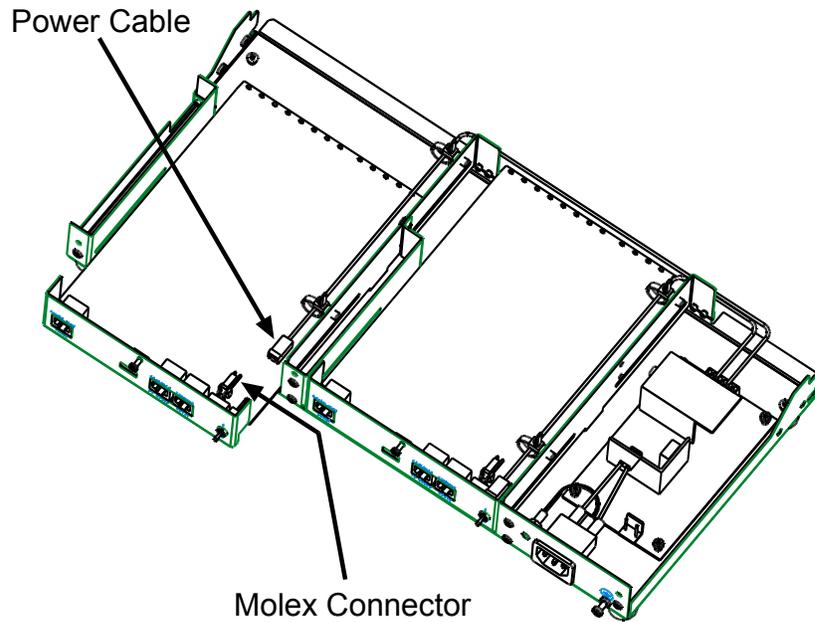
MVP2410/3010 Chassis (top/rear view)
